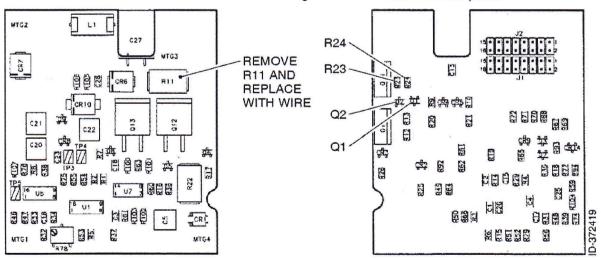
(Sheet 1 of 1) Servo Circuit Board Component Locations
